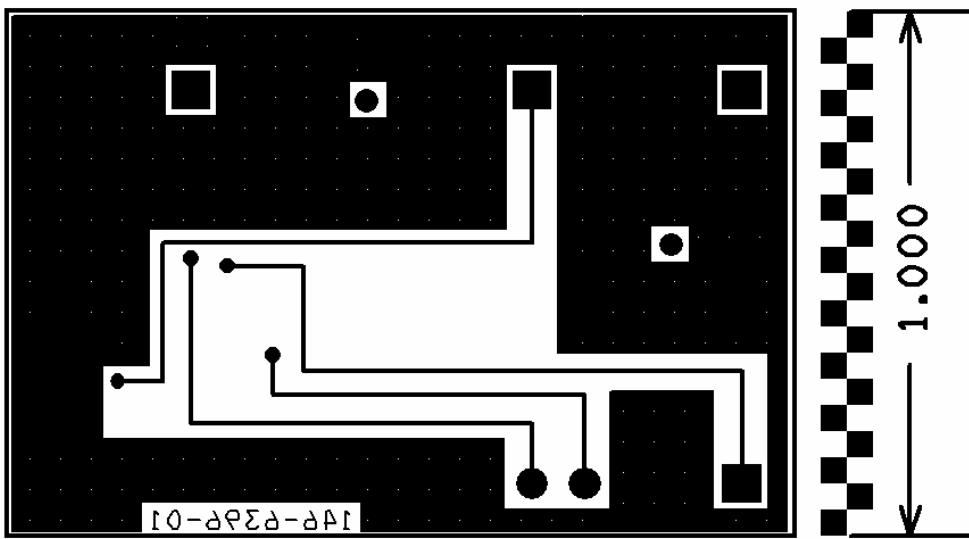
SP6644/6645UEB PC LAYOUT BOTTOM SIDE
